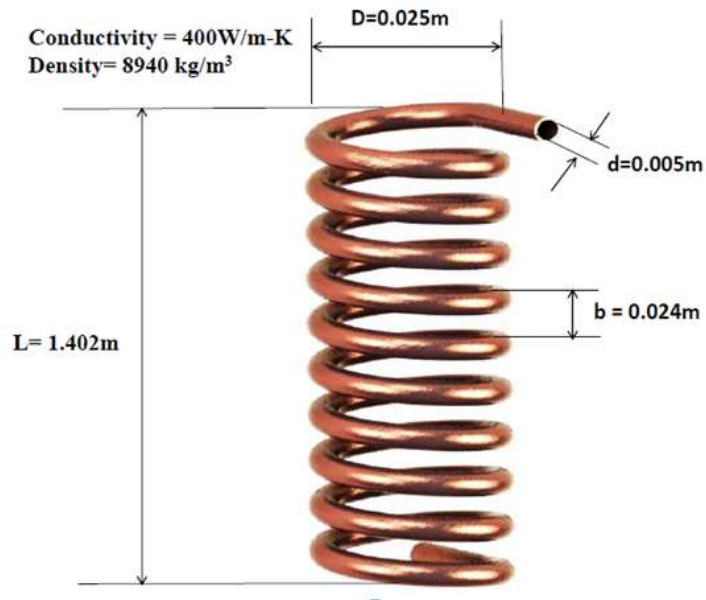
Dimensions of copper helical coil absorber tube used in PTC
